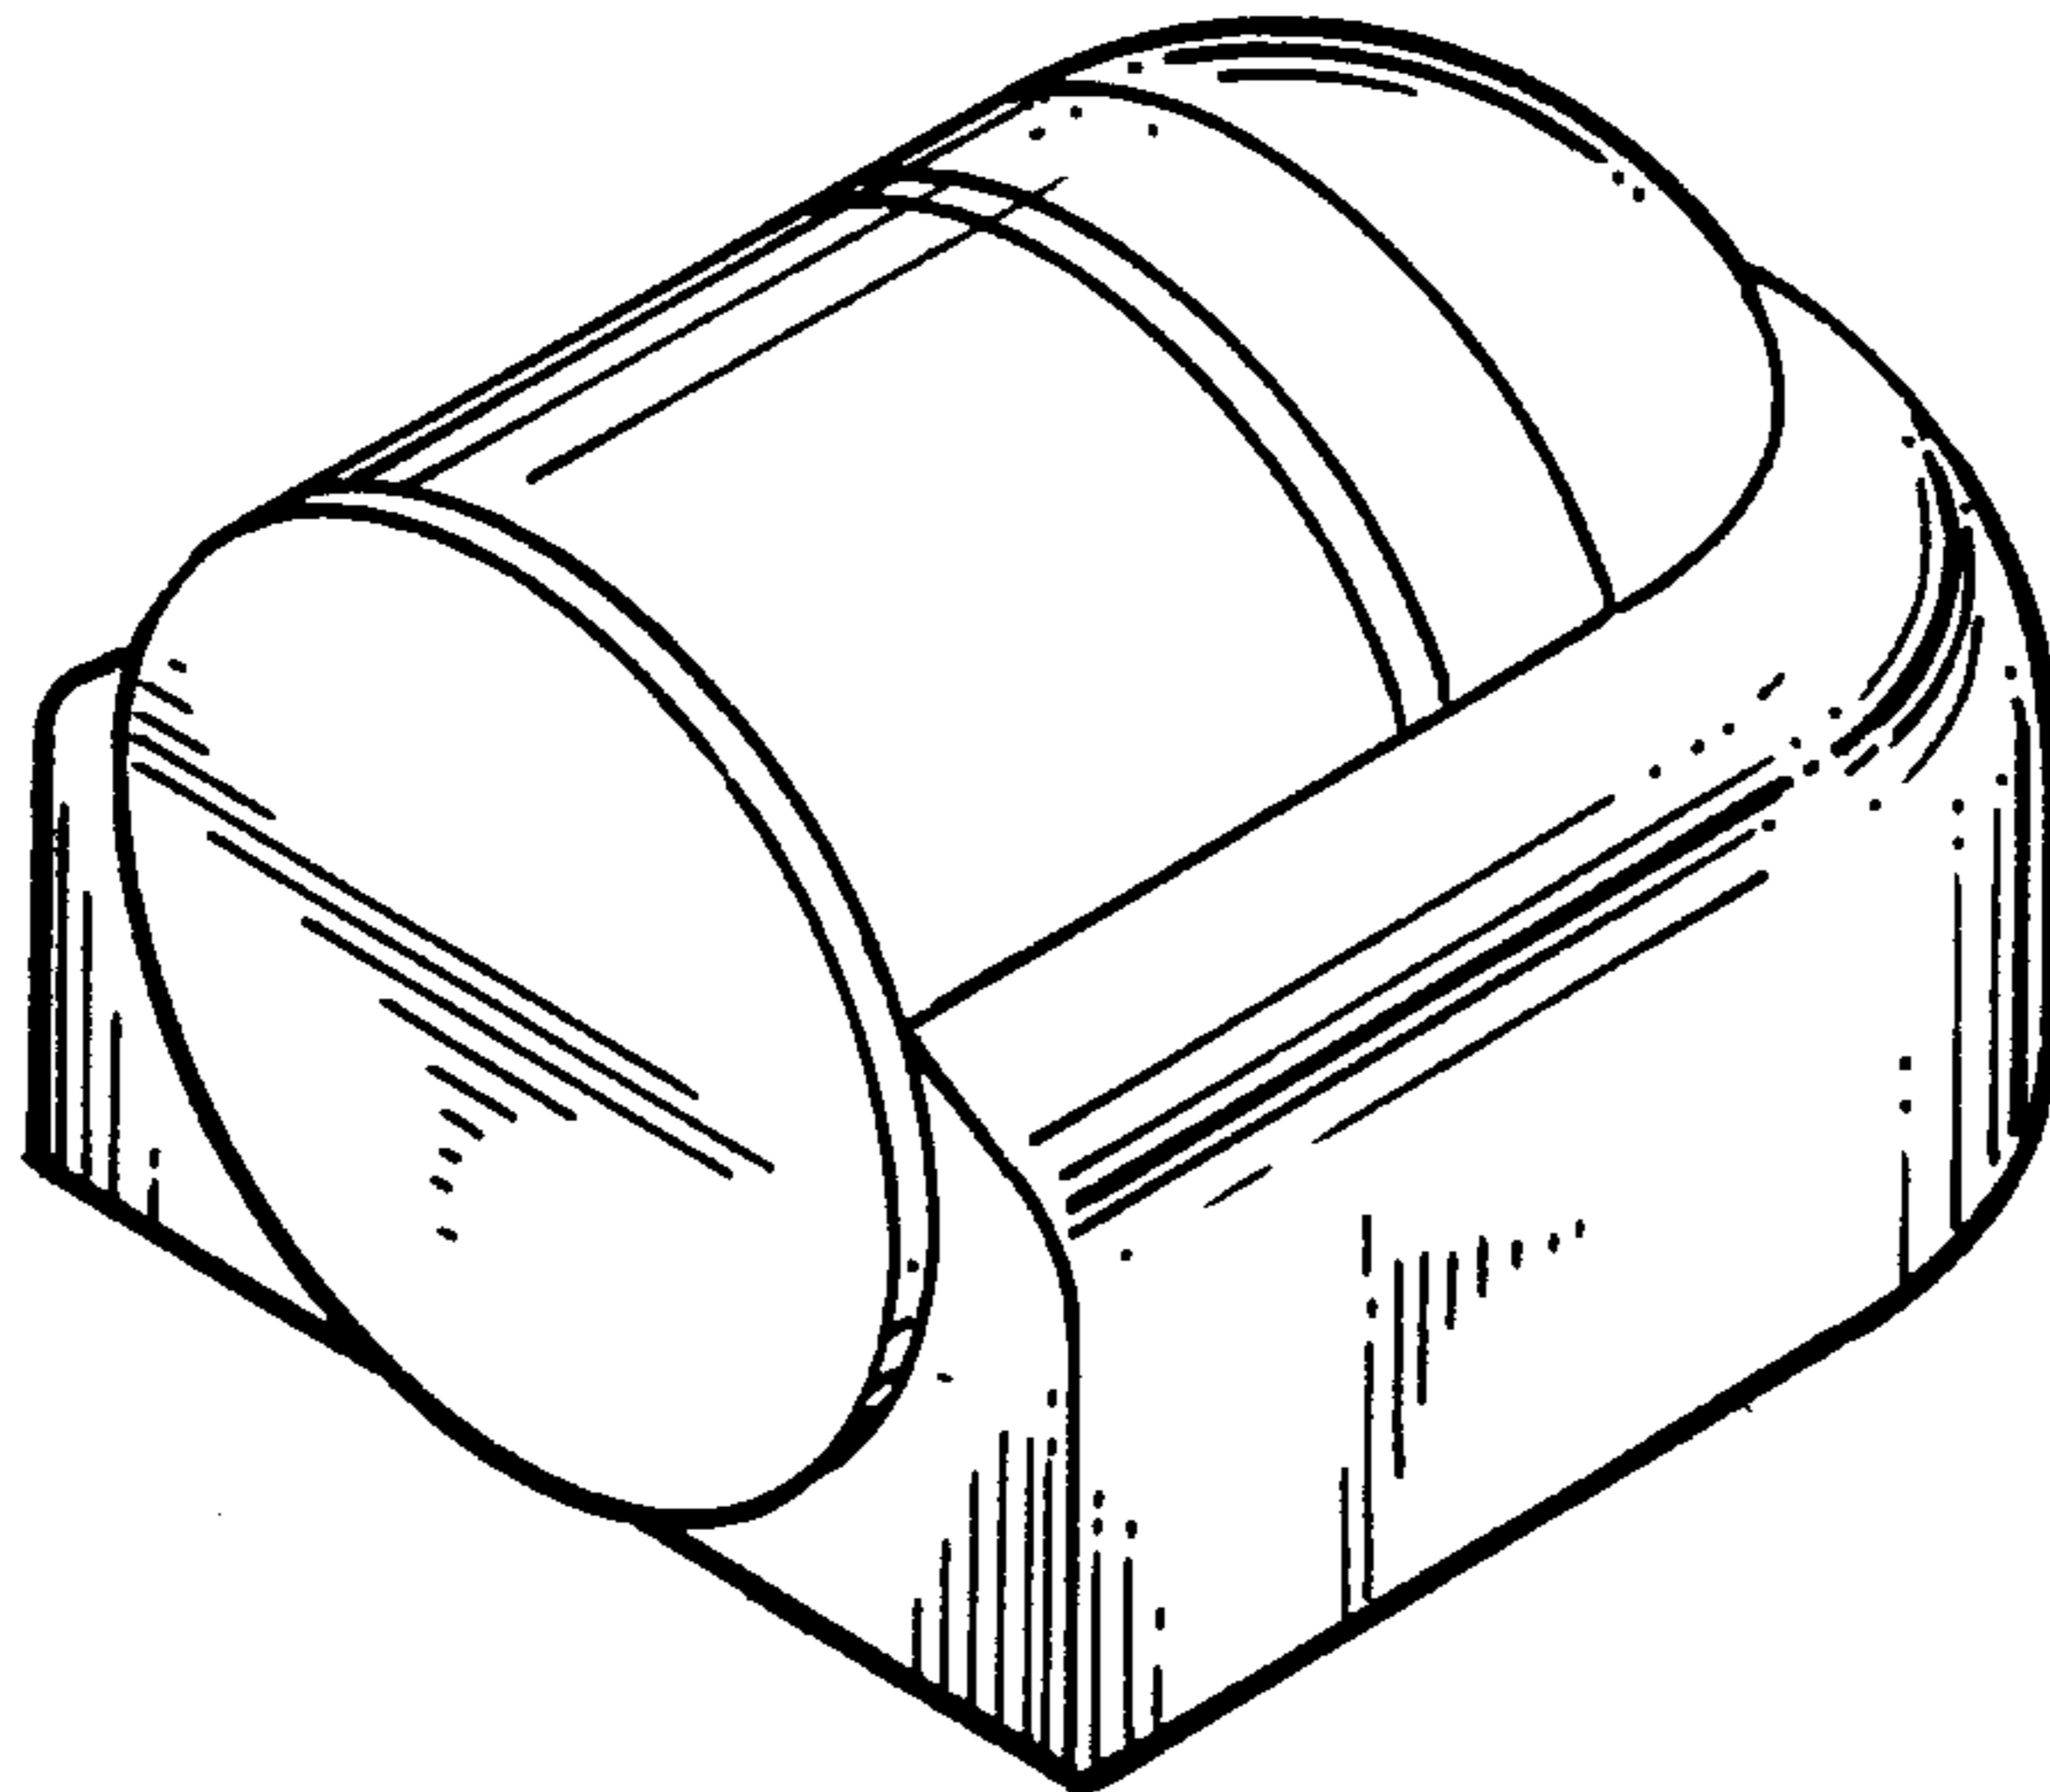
is a top, front, and right side perspective view of a cutting tooth for a rotating drag bit showing my new design;
